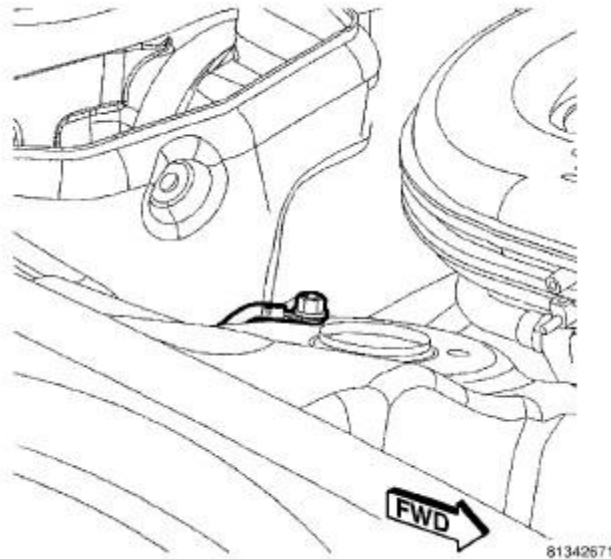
Fastener Securing Negative Battery Cable To Right Front Strut Tower
